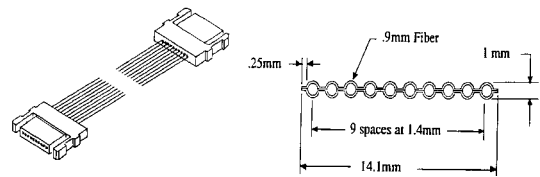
Schematic view of a 10-fiber optical cable assembly.
